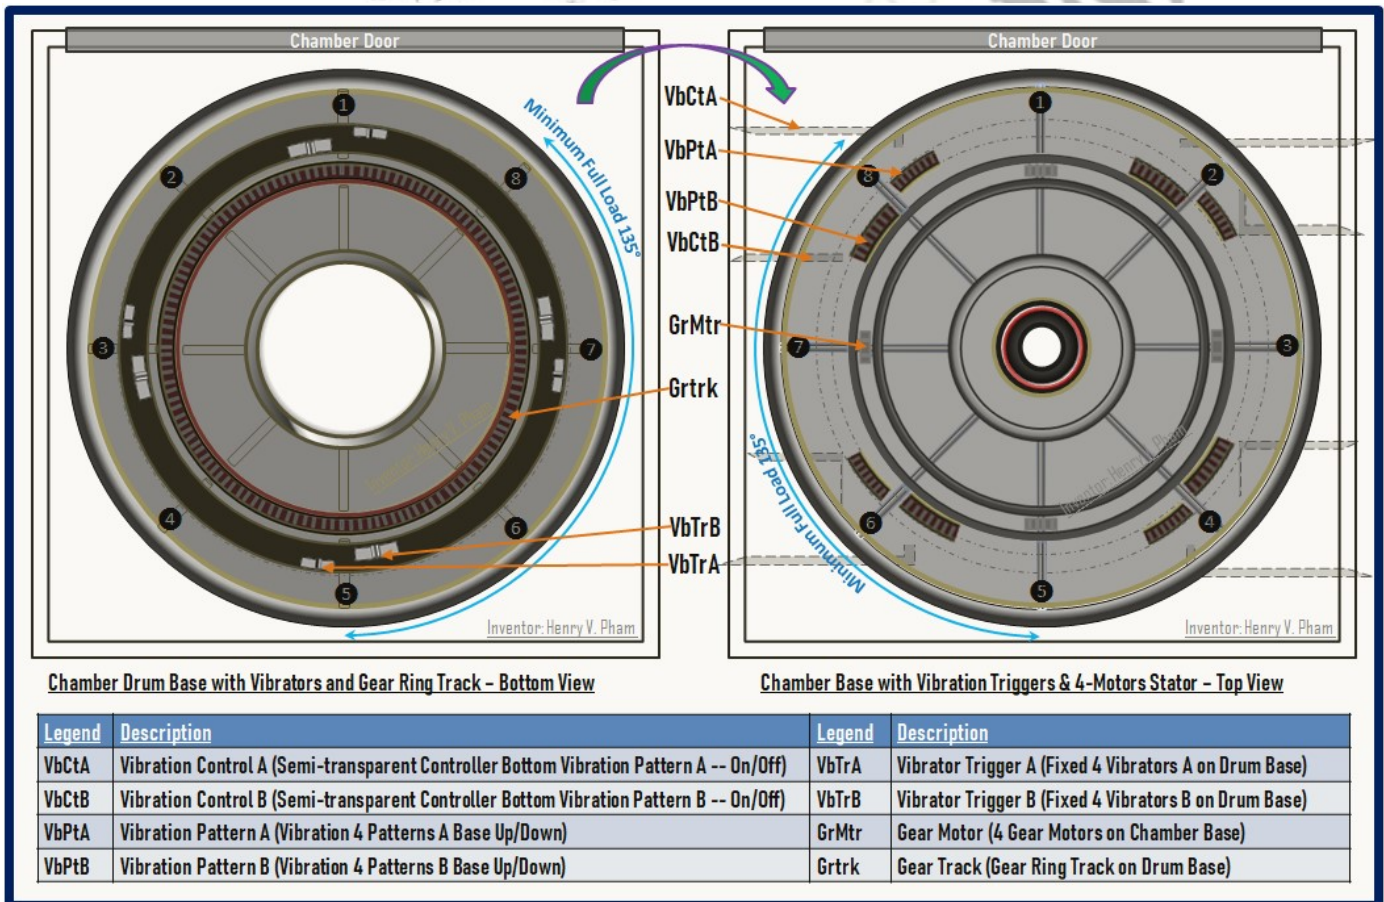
Rotator Drum Base & Stator Chamber Base without Rollers View
